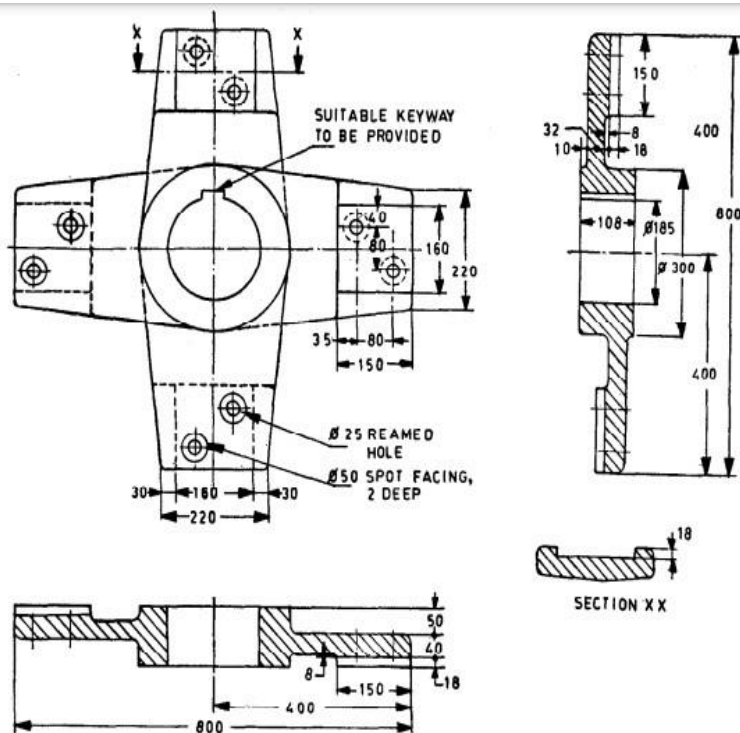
CANE CUTTER HUB FOR BOLTLESS TYPE CANE KNIFE
